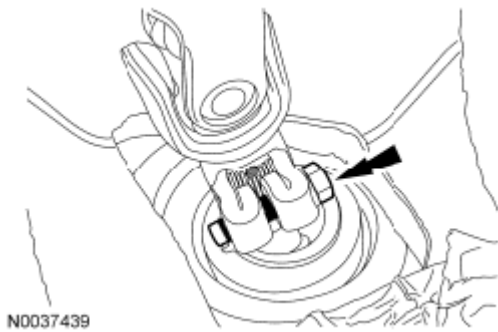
Locating Steering Intermediate Shaft Onto Steering Gear
